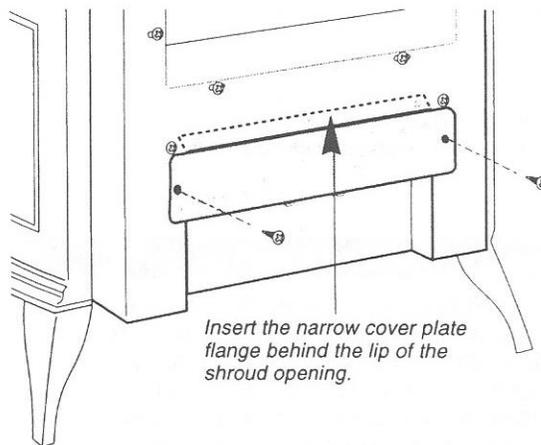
Secure the cover plate with two #10 x 1/2" sheet metal screws.
